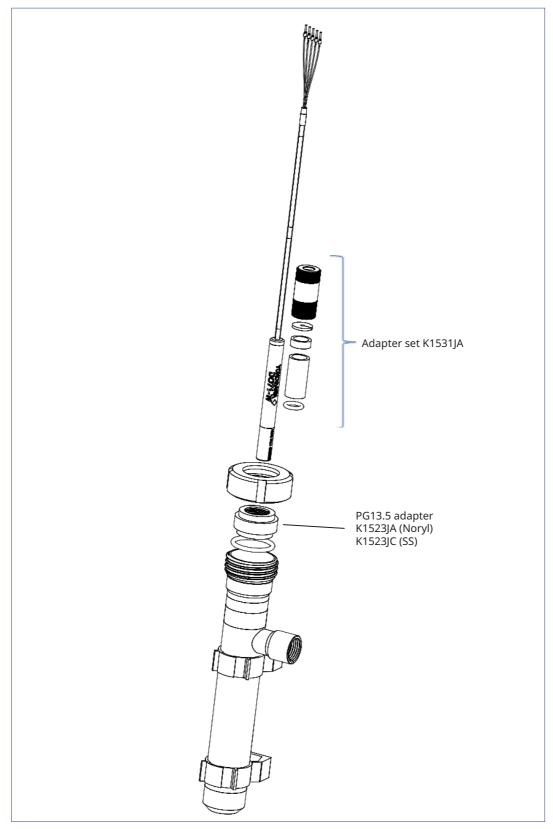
DO71 installation in Yokogawa FF40 fitting⁶ using the adapter K1531JA sensor adapter set to fit in PG13.5 fitting adapter K1523JA (Noryl) K1523JC (SS) IM12J06J01-00EN-P
